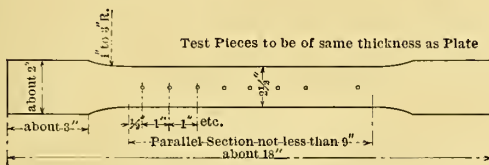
STANDARD TEST PIECE FOR BOILER PLATE.
